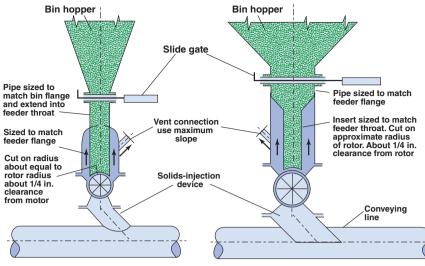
Closed-bottom rotary valves are widely used in pneumatic conveying applications because they provide a good air seal between the rotor edges and the valve body
